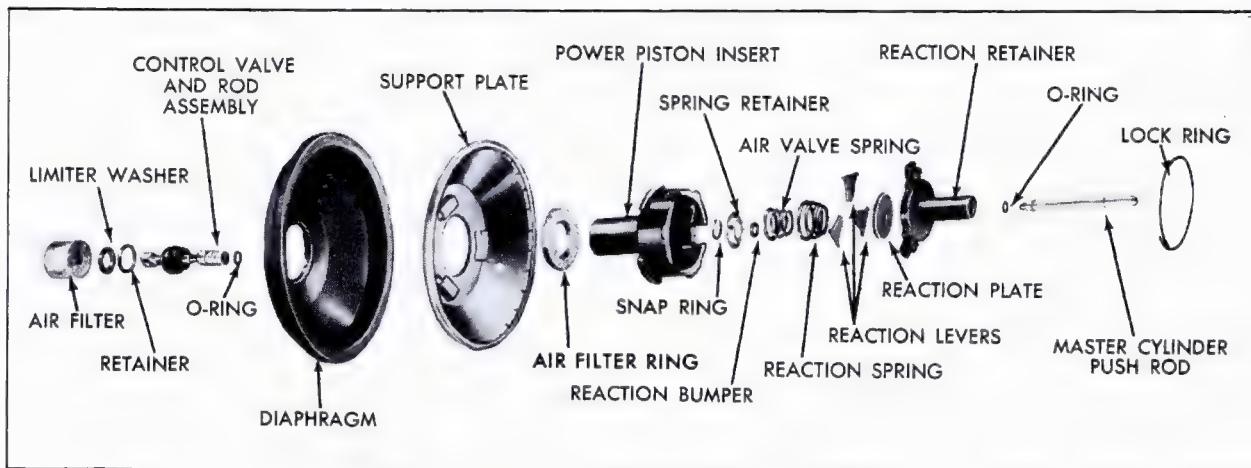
Single Diaphragm Power Piston Disassembled
